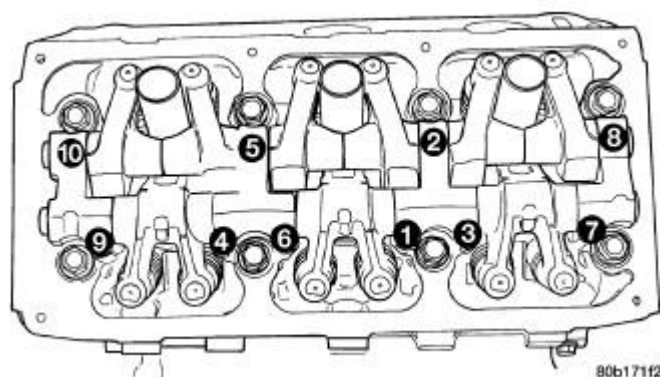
Rocker Arm/Shaft Assembly Bolt Tightening Sequence
